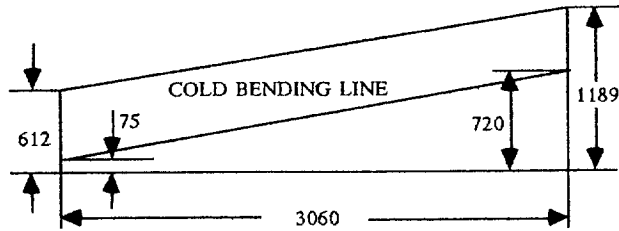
Overall dimension of plate and cold bending scheme (unit : mm)
